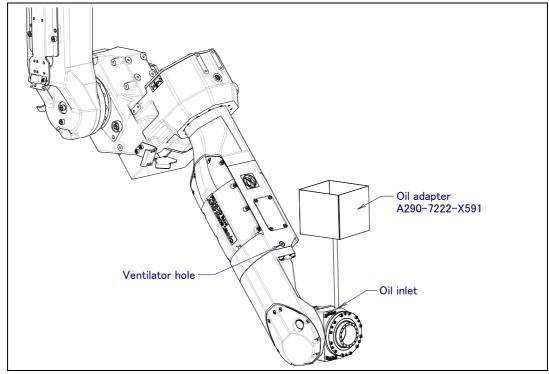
(h) Oil adapter (for J5/J6-axis gearbox oil inlet)
